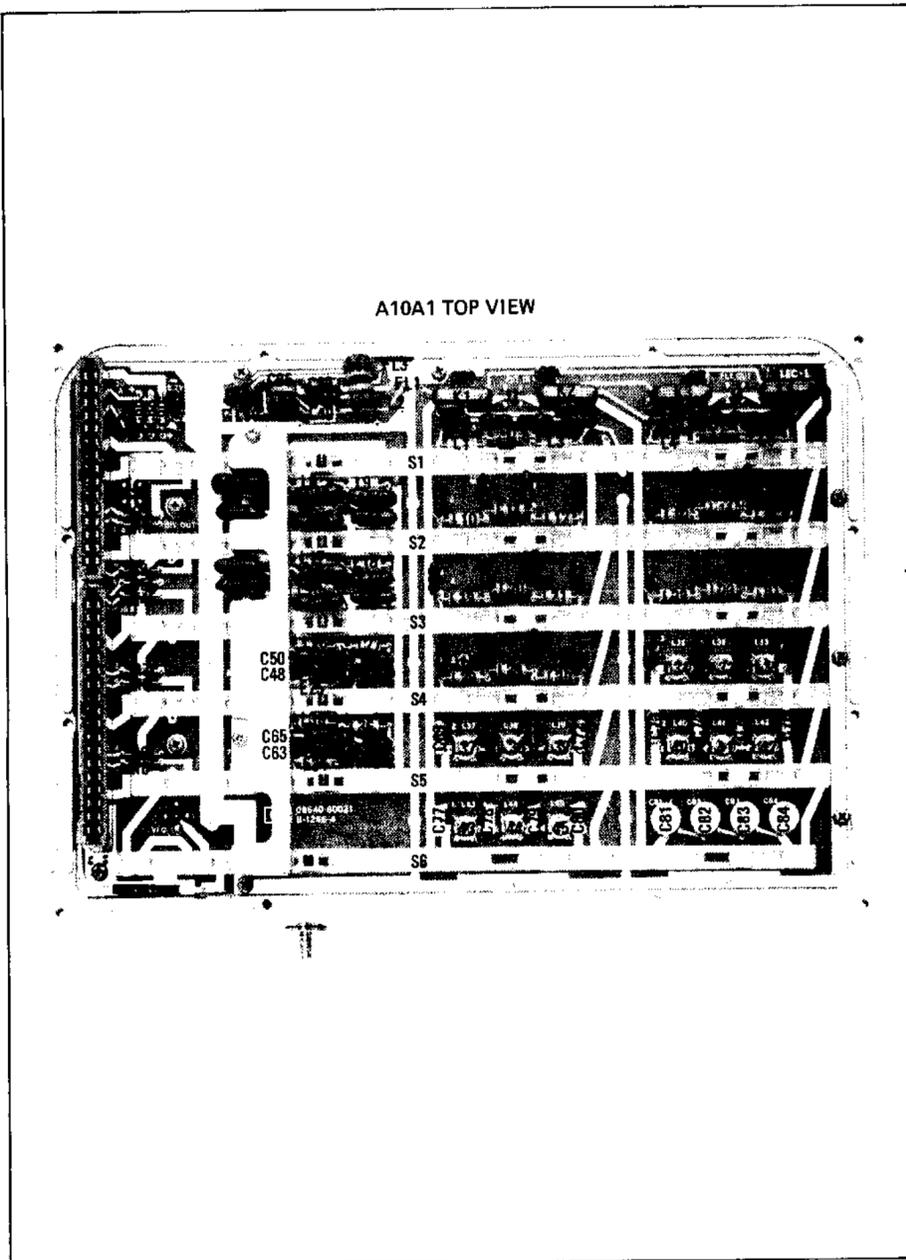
A10A1 RF Filter Assembly Component Locations (2 of 2)
